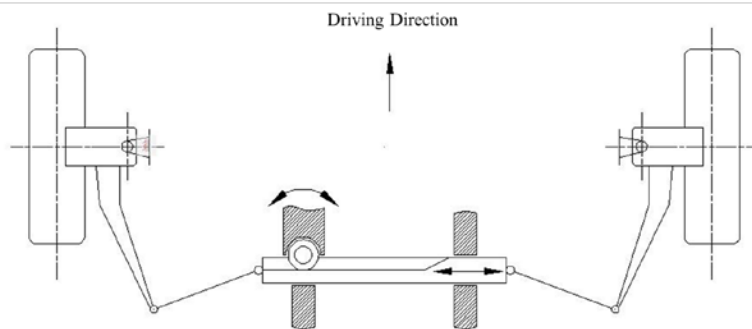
Rear-displacement steering trapezoidal structure intention of the steering gear behind the front axle
